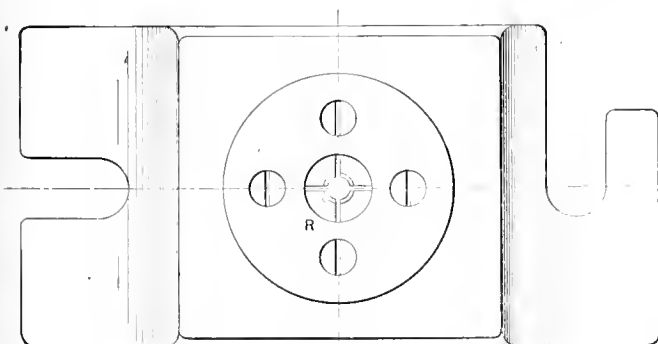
Die for Forming Key on Piece shown in Fig. 1.
